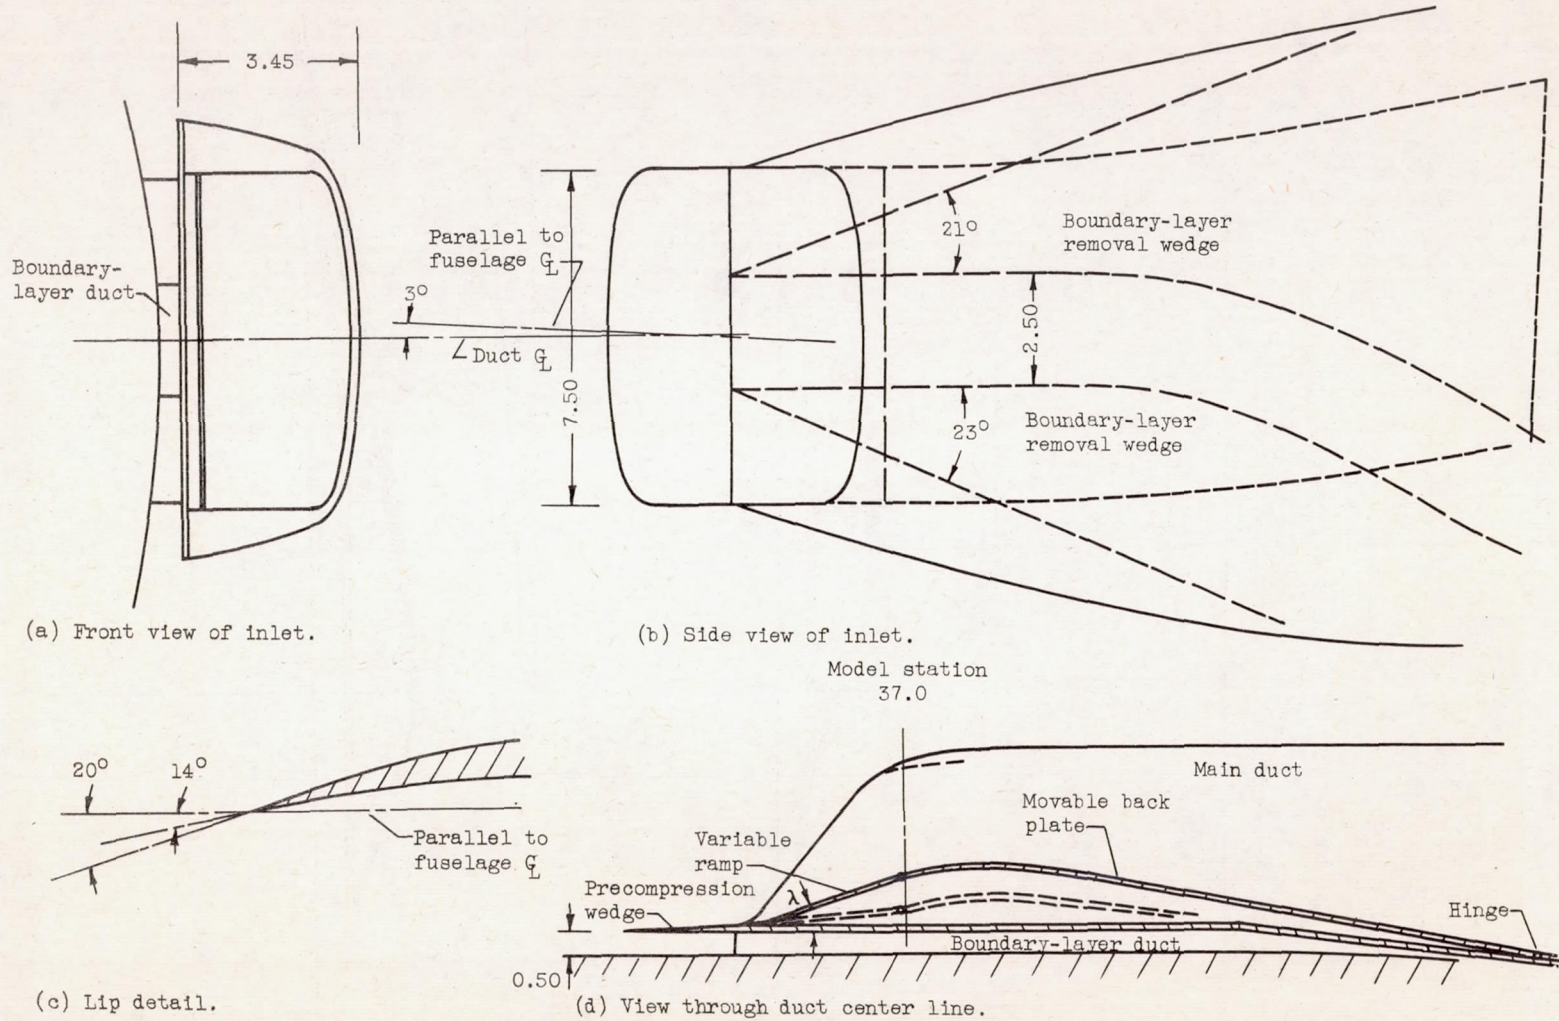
Detailed views of inlet configurations (all dimensions are in inches).
